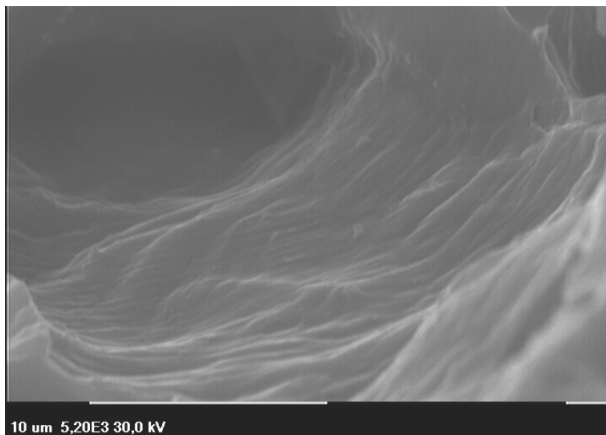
Bands of plastic deformation on the surface of 710/900 weld fracture
